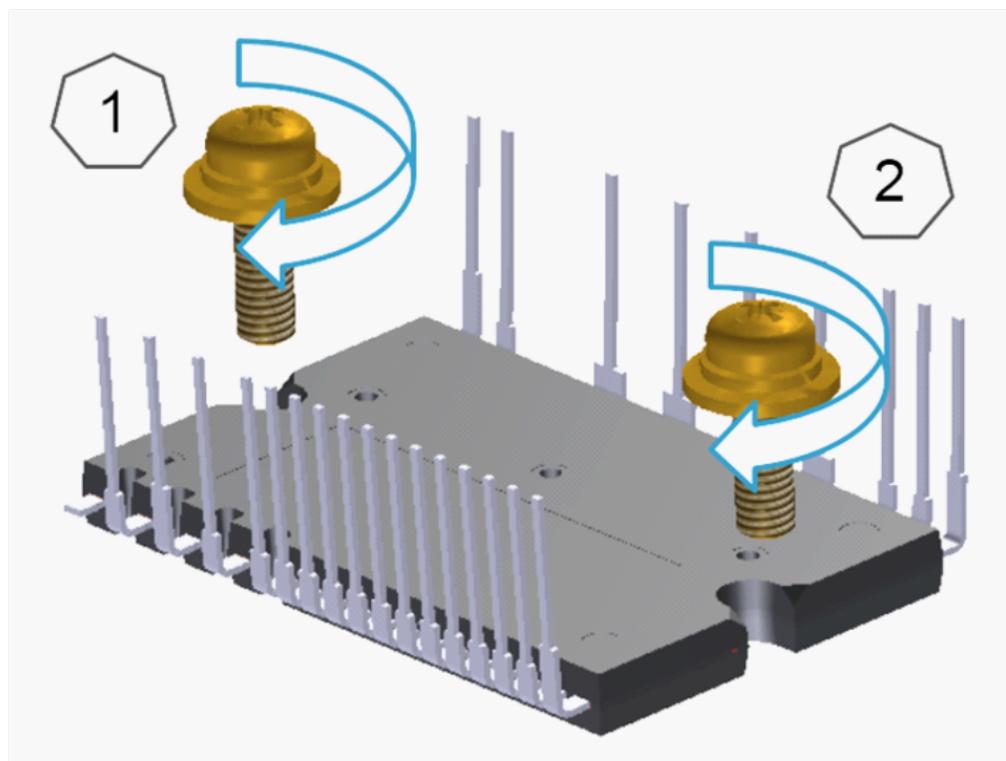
Recommended mounting screw fastening sequence](#) shows the recommended fastening sequence for mounting screws. ST recommends temporarily tightening mounting screws with the fixing torque set at 0.1/0.2 Nm and then permanently screwing them with a torque 0.55 Nm (0.70 Nm max.) crosswise.
